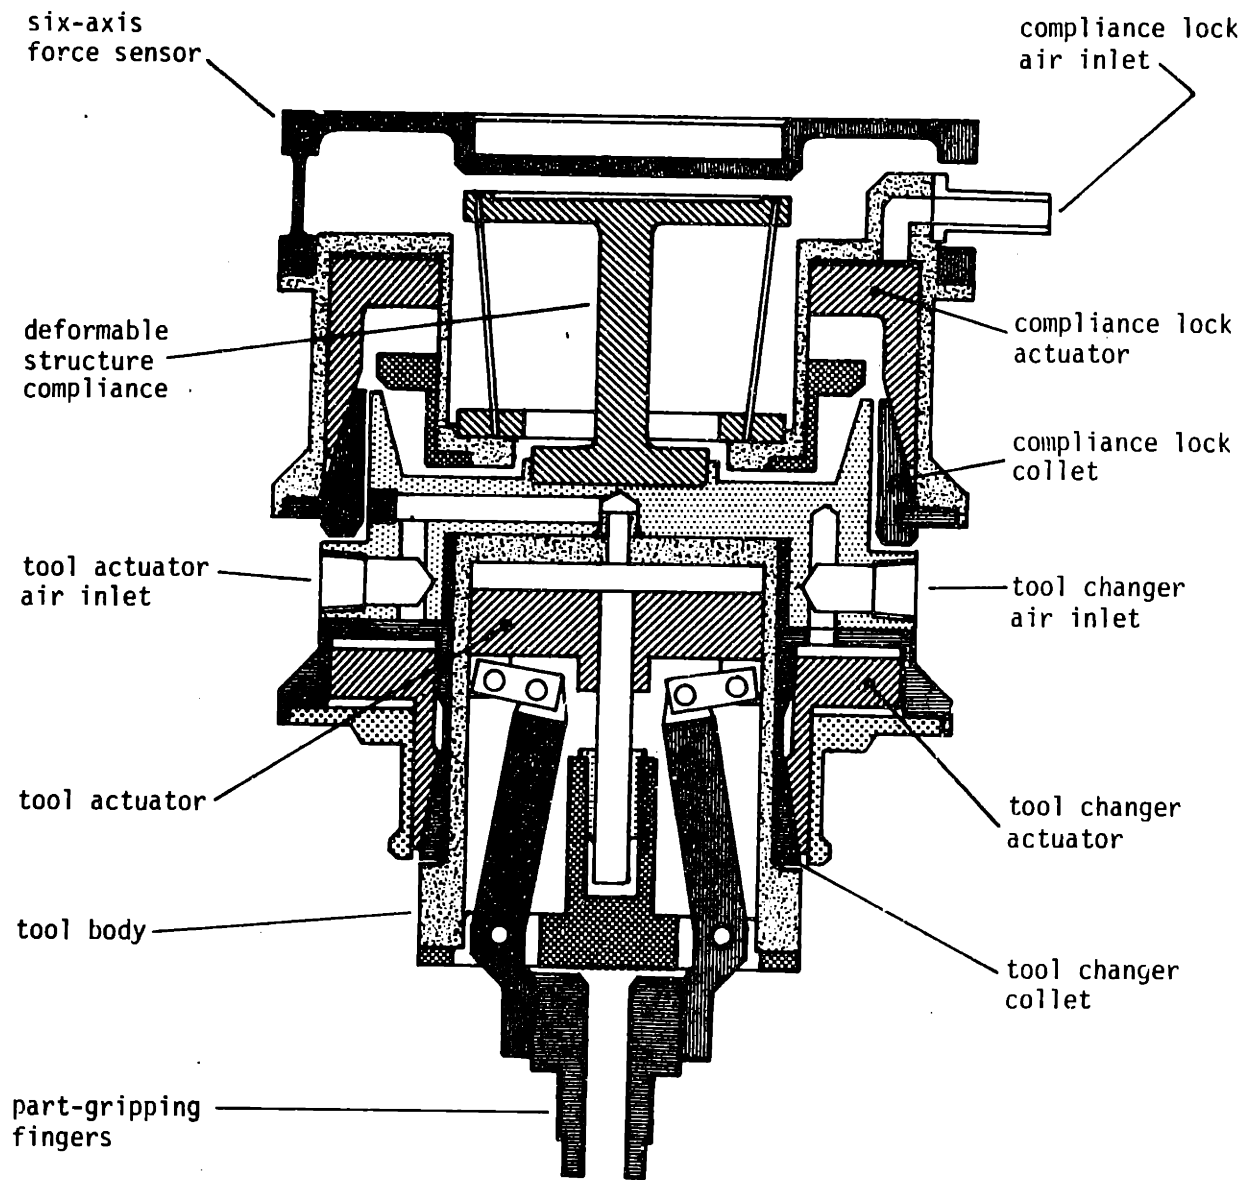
Cross-sectional drawing of the complete compliance system (shown with a six-axis force sensor).
